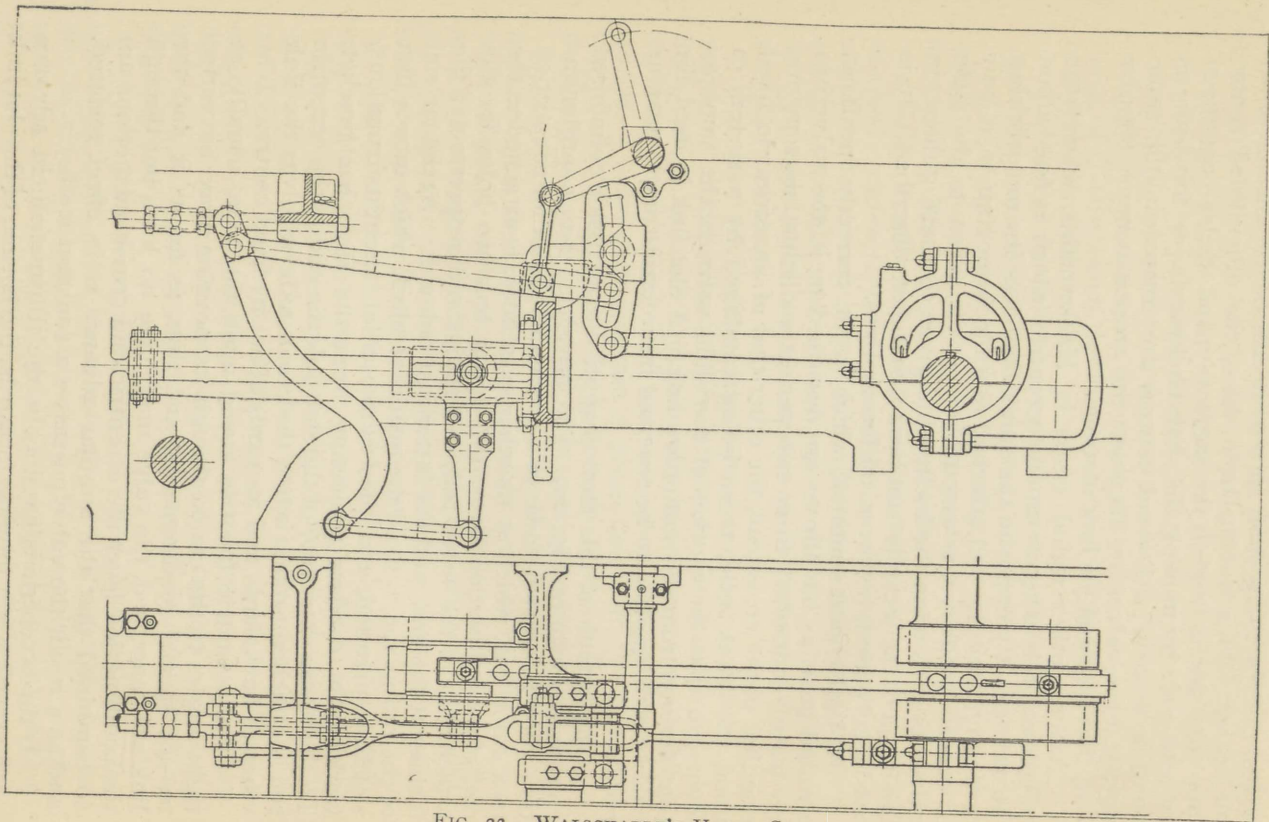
WALSCHAERT'S VALVE GEAR.
